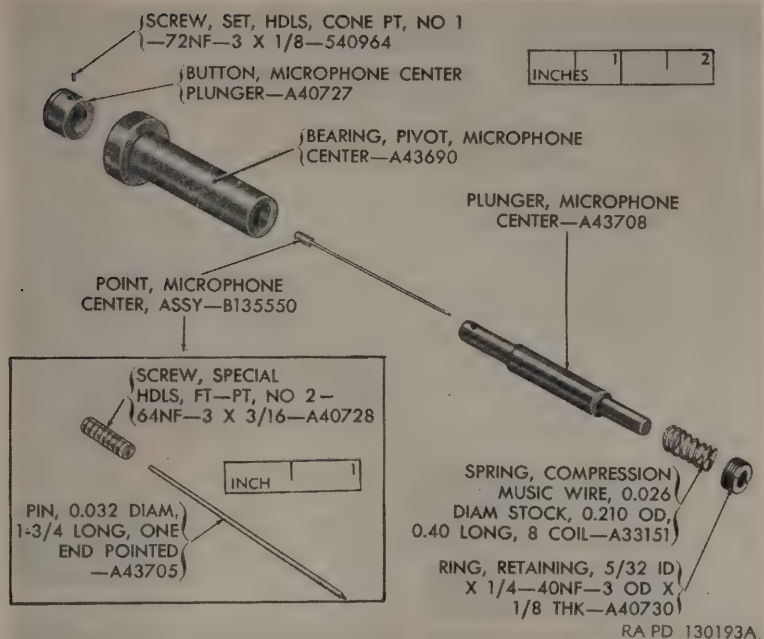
Components of the microphone center assembly—sound-ranging plotting board M1 or M1A1.
